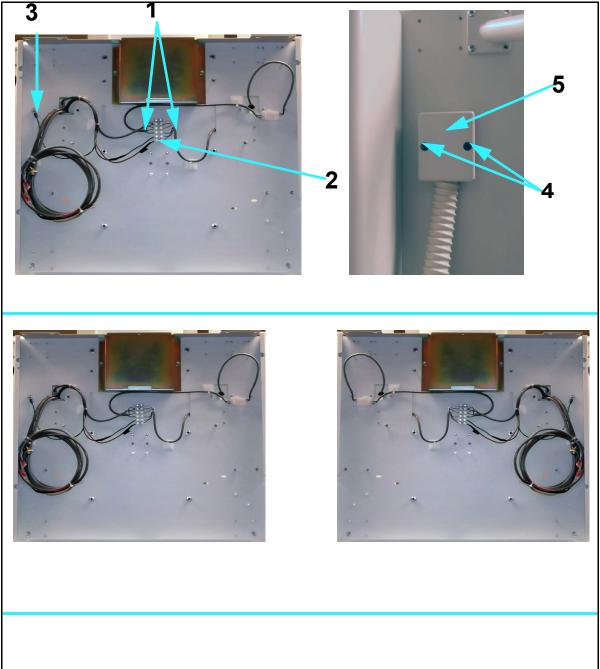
Lock Mechanism Assembly (Left & Right Shown)
